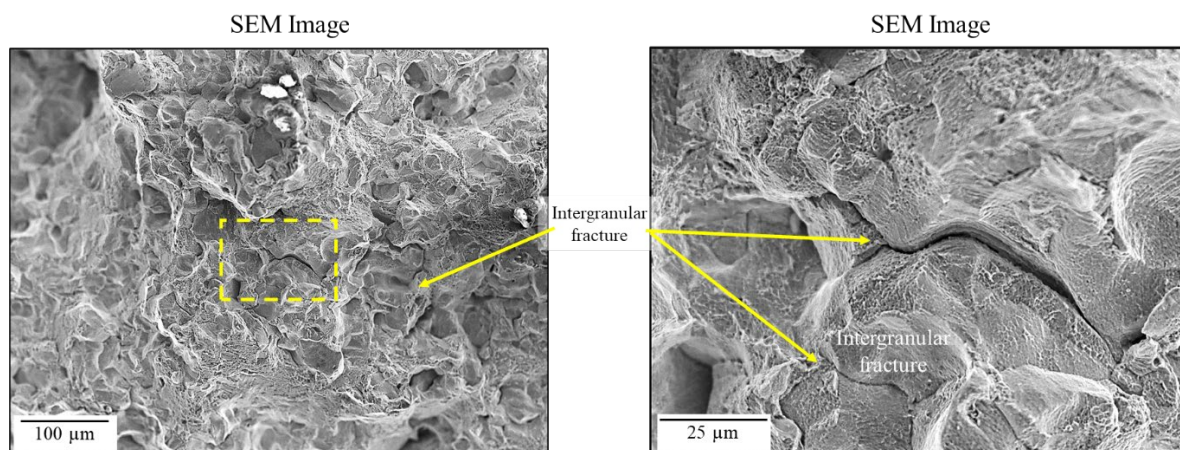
Cross-sectional views of the fractured tensile samples after testing at 1,200 °F.
